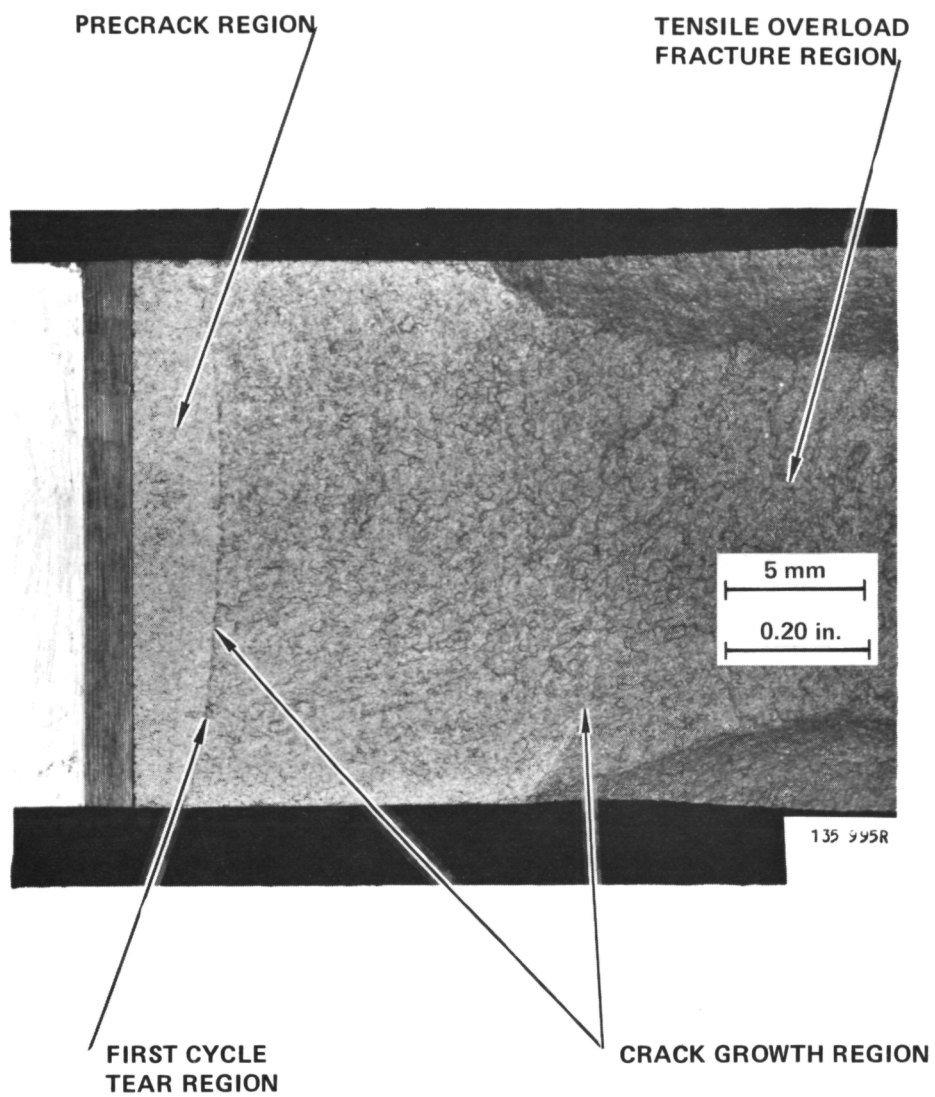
Fracture Surface of WOL Coupon 5CR-2
